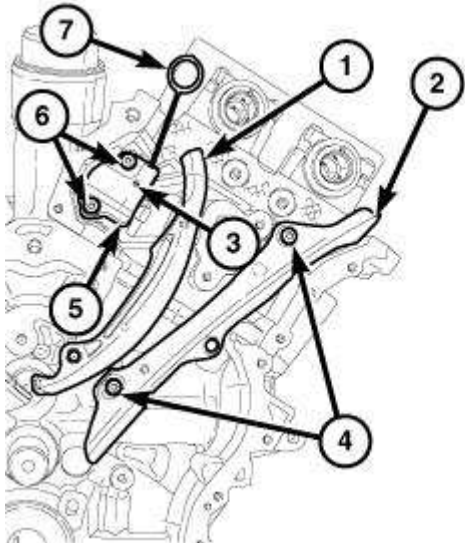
Left Cam Chain Tensioner, Arm, Guide & Bolts
